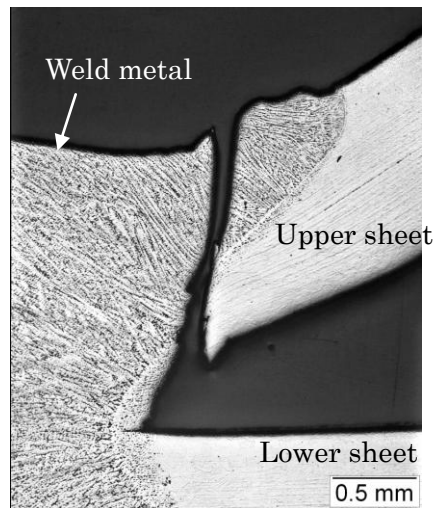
A typical fracture portion of arc spot welded joint ($d=5\text{mm}$, $V_w=5.2\text{m/min}$).
